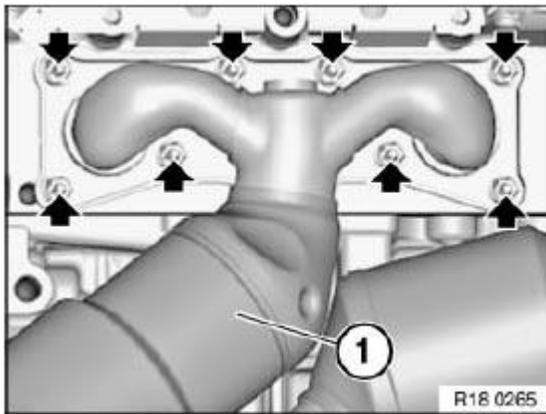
Identifying Exhaust Manifold With Mounting Nuts
